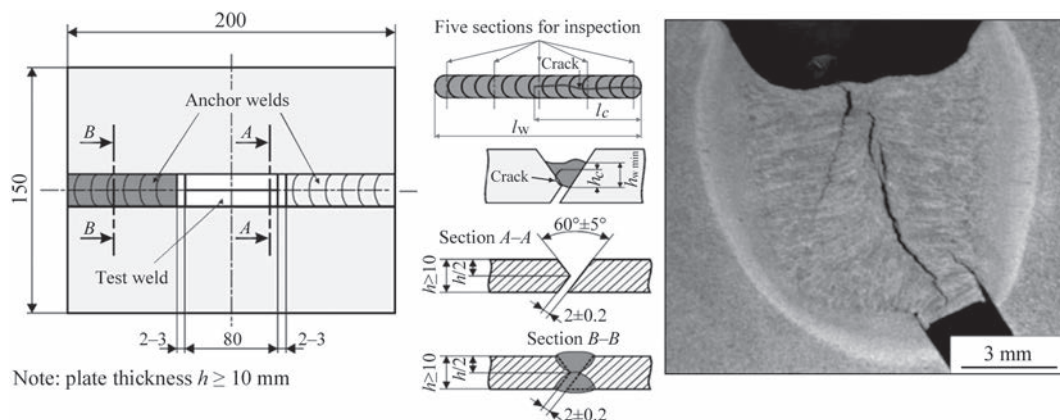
TEKKEN-Test: *a* — weld sample; *b* — welded Y-groove with cold crack, taken with permission by Springer Nature from ref. [9]
